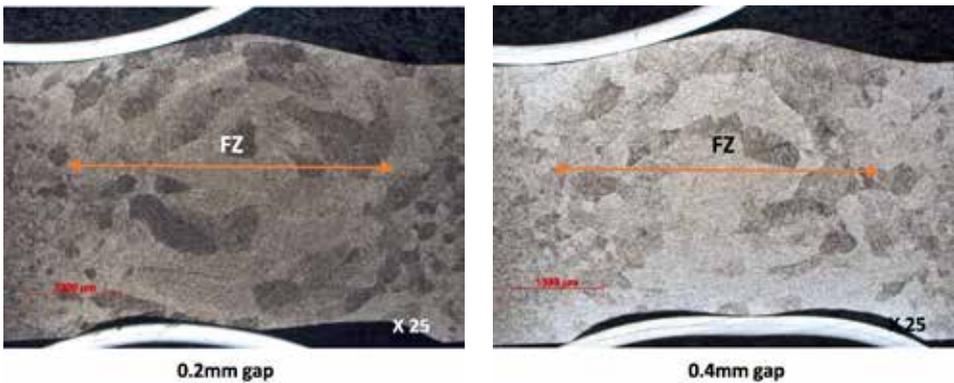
Transverse sections of the wire filler welds with different joint gaps; 3.2mm thick butt joints; 3kW average power; argon shield gas
